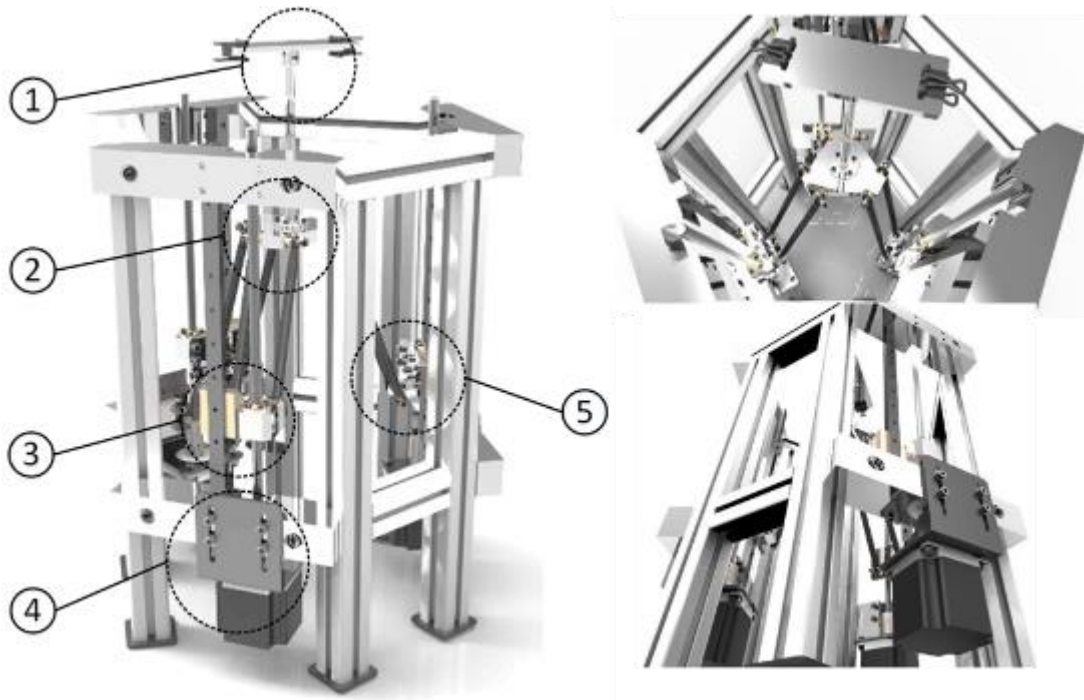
3D stage assembly designed for the printing of the PEEK compatible with the extruder
